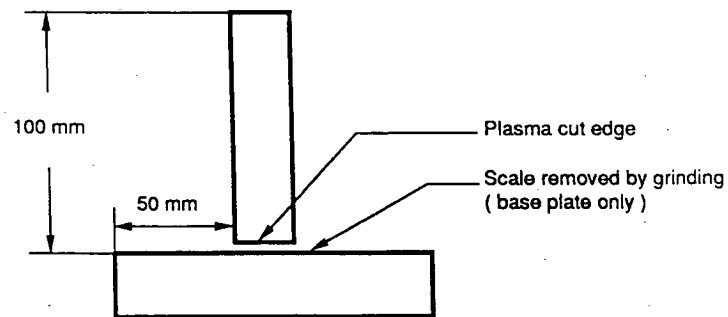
Weld preparation for fillet-welded T-butt joint.
